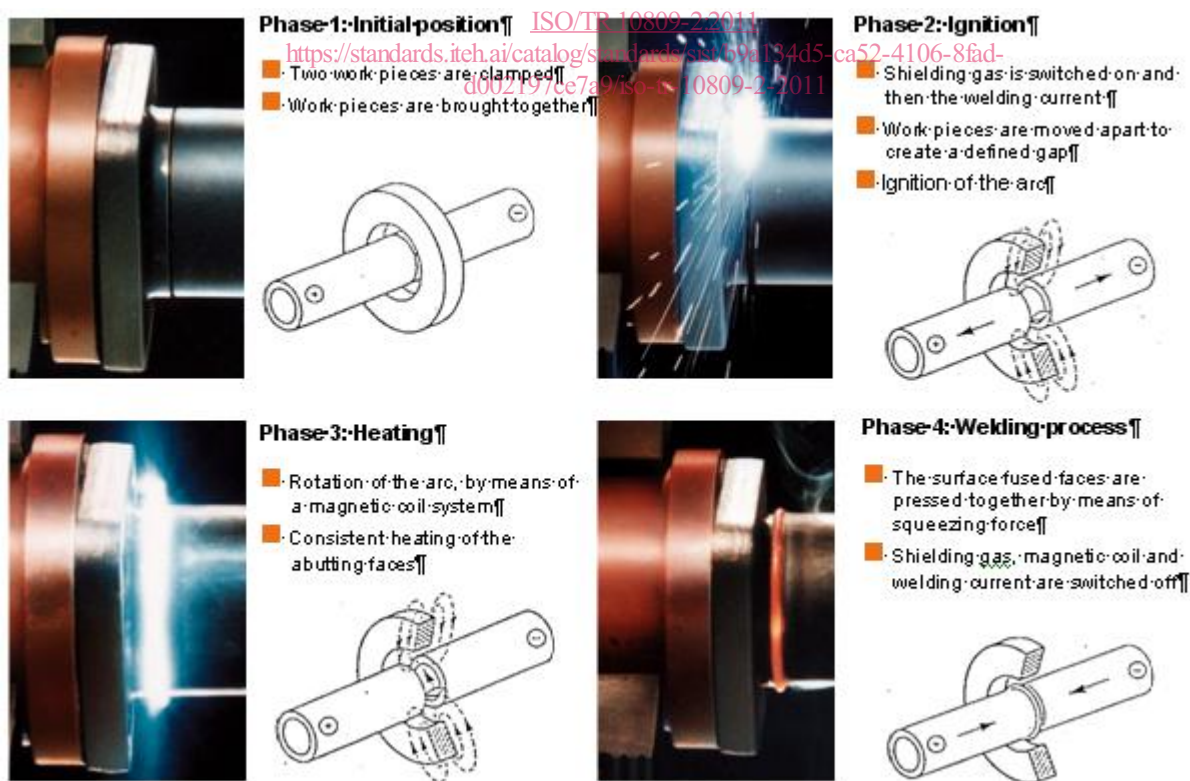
Successive process steps of magnetically impelled arc welding
